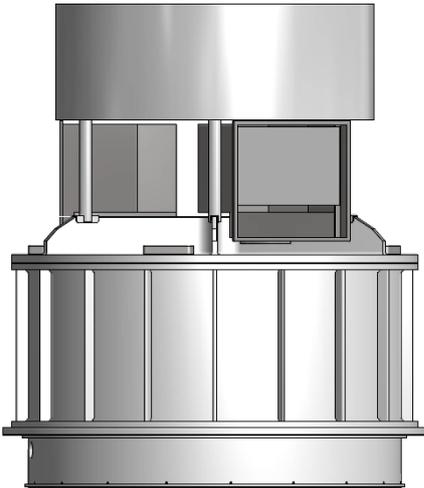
Side view of the feed package. The cable wrap drum is shown on top with the equipment cabinets in the middle and cryostat at the bottom.
